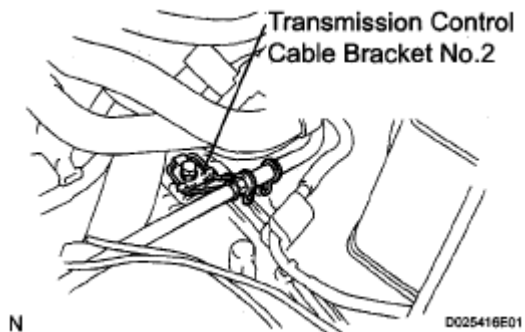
Identifying Transmission Control Cable Bracket No. 2
